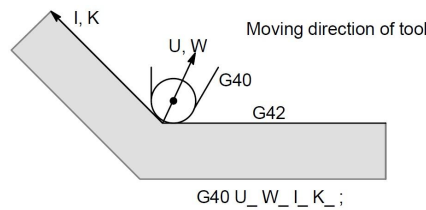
Tool movement when the moving direction of the tool in a block
